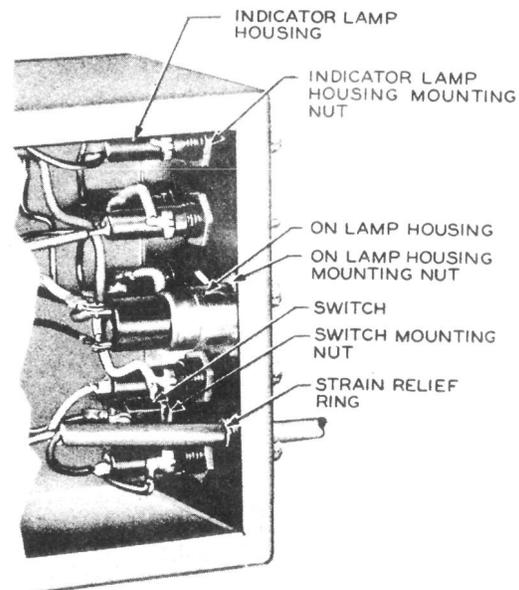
KS-14778 Photo Processor — Partial View With Access Panel Removed Showing Lamp Housings, Switches, and Associated Parts
